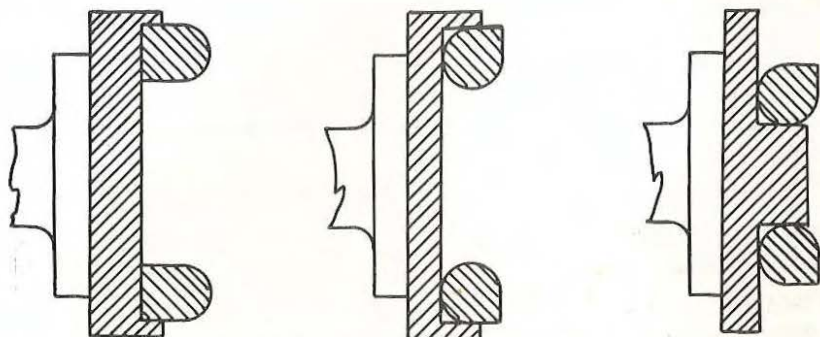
Using chucks made from scrap stock. Take light cuts during these operations. chucks made from pieces of wood scrap. Figure 329 shows how a doughnut ring can be turned while held in two simple chucks made especially for the job. The contact between the work and the chuck must be a snug push fit.
